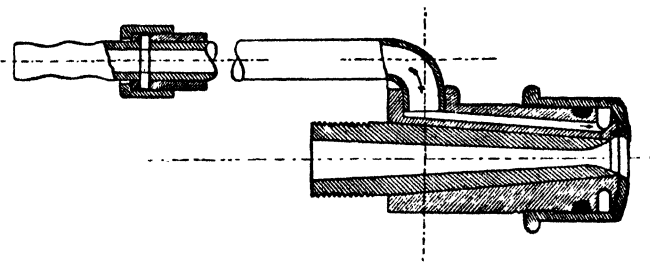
Nozzle with Annular Gas Burner for Heating the Metal Powder immediately before it is Sprayed.
